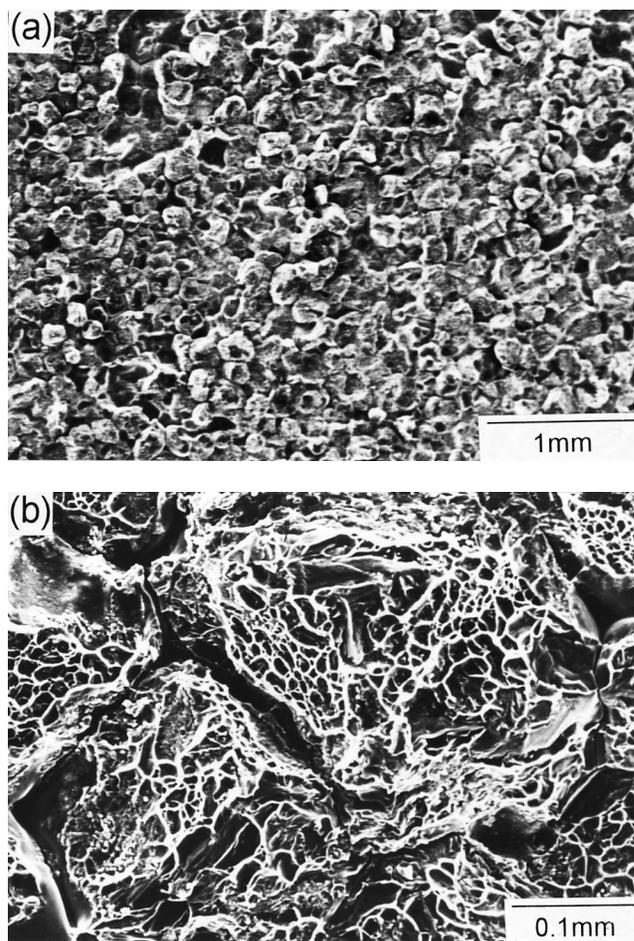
(a) and (b) Fractographs of the tensile tested 6061-T6 butt joint brazed with Al-7Si-20Cu-2Sn-1Mg filler metal at 600 °C for 60 min followed with a T6 post-treatment.
